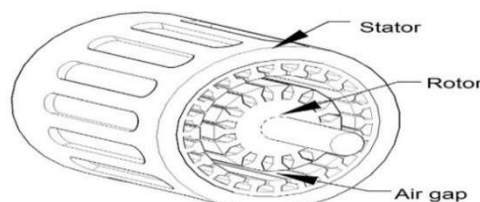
Cross-Sectional View of an Induction Motor's Stator and Rotor Assembly
